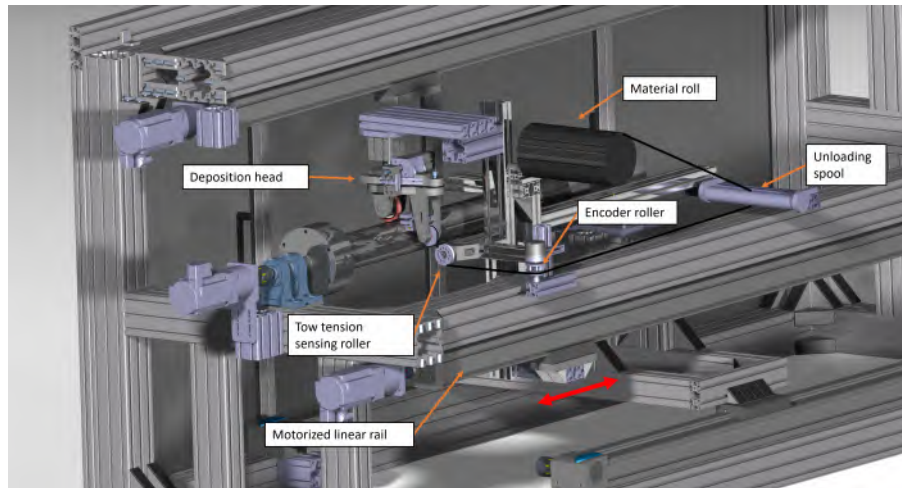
Deposition assembly in position to the side of the mandrel.
